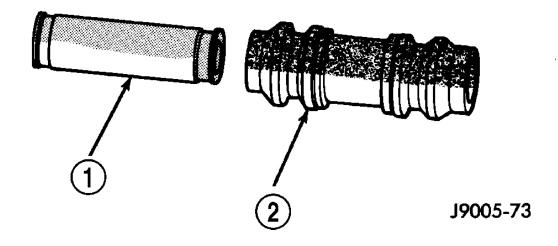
Removing Caliper Mounting Bolt Bushings And Boots Courtesy of CHRYSLER LLC
